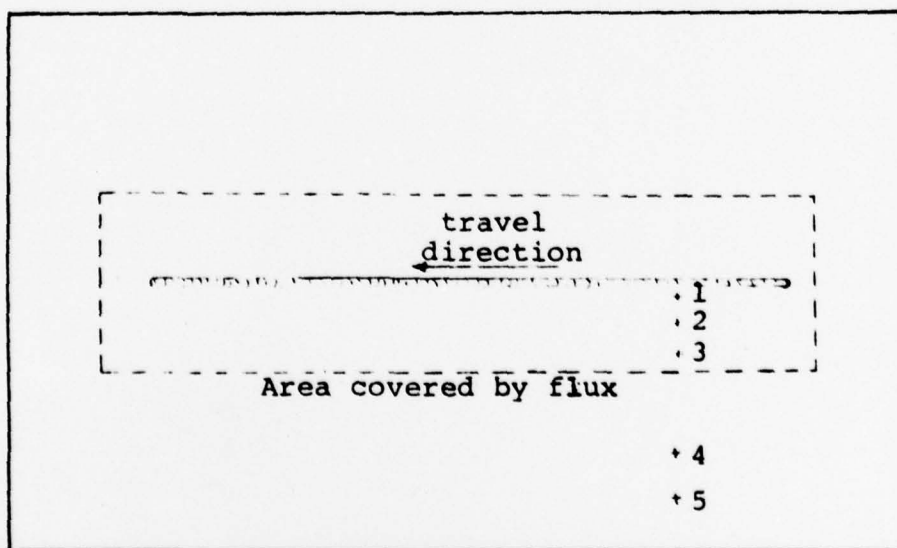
Thermcouple location on Welding Plate (one-half actual size).
